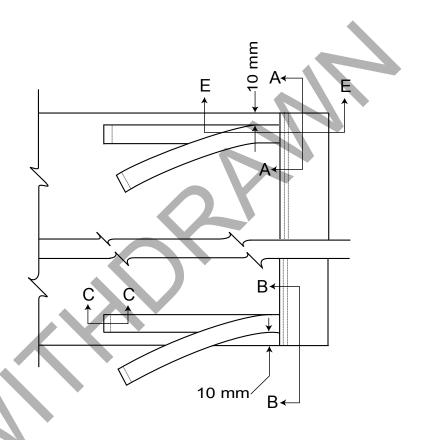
Type 2 — Header, open-sleeve with tie tapes
